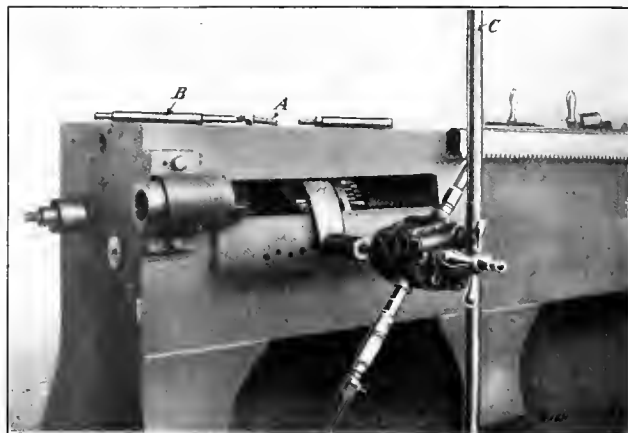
Method of Drilling and Reaming the Holes in the Lathe Bed for the Tumbler Locking Pins
